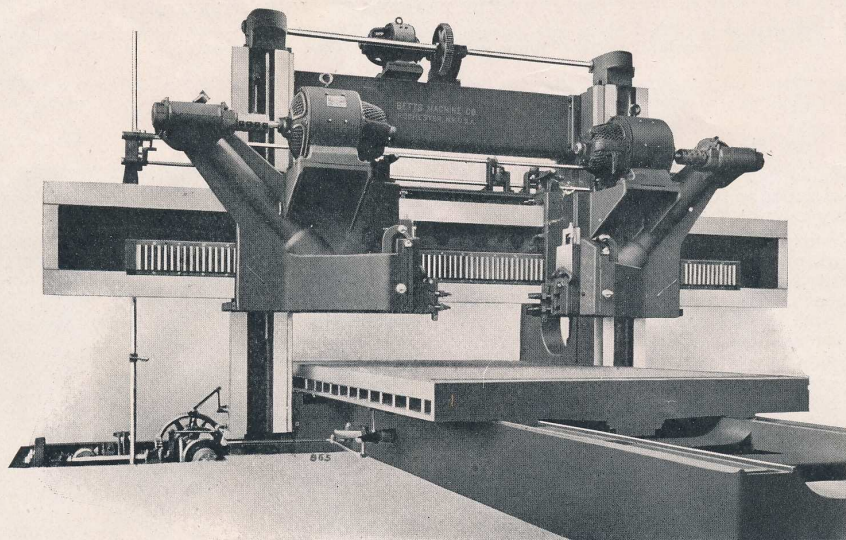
BETTS HEAVY DUTY CROSS CUTTING PLANING MACHINE, TYPE A4400
